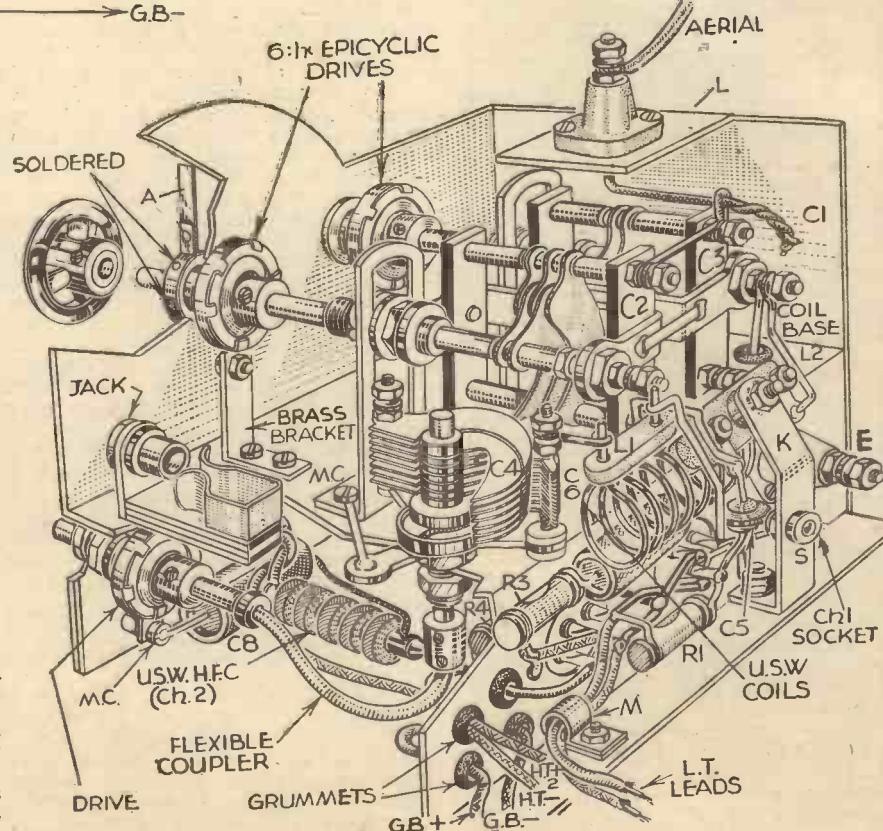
Pictorial view of rear of chassis showing layout of components.
